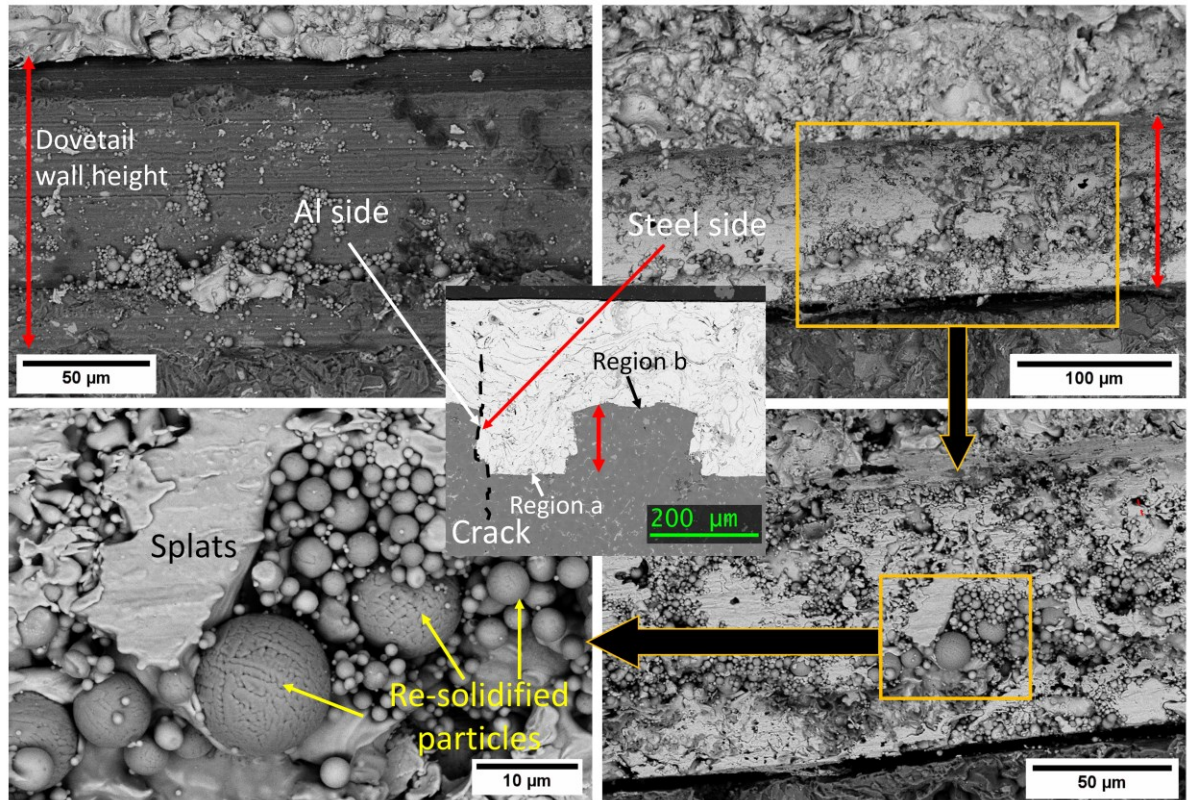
Detailed view of the fracture surface on both Al substrate and steel coating sides.
